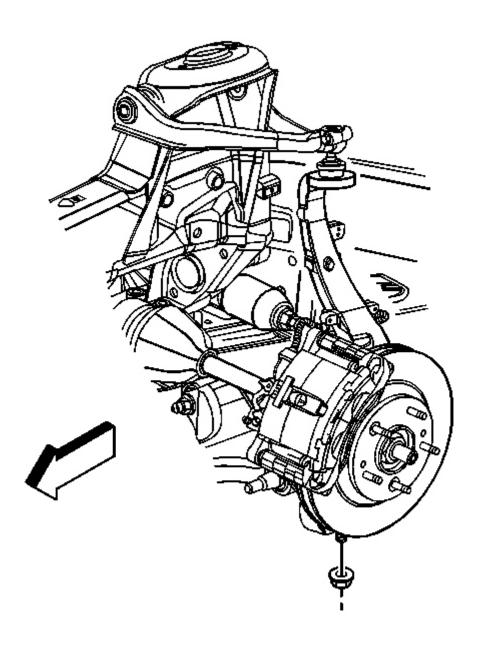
Removing/Installing Lower Ball Joint Retaining Nut Courtesy of GENERAL MOTORS CORP.
